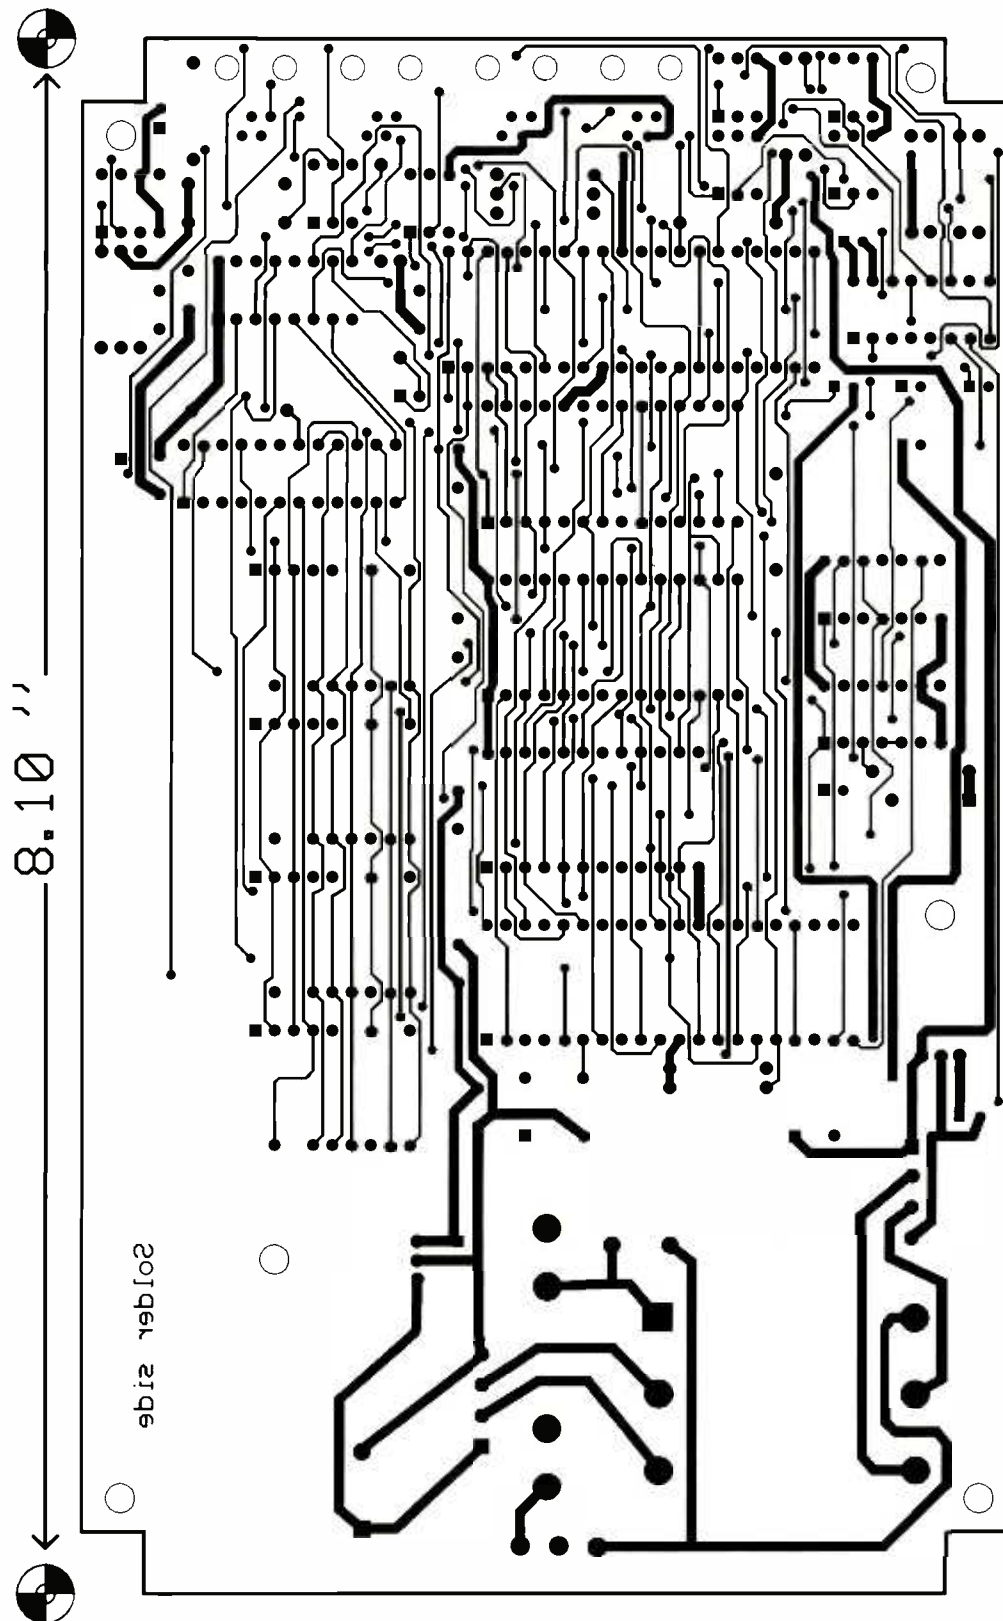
Above is the solder-side foil pattern for the double-sided circuit board.
